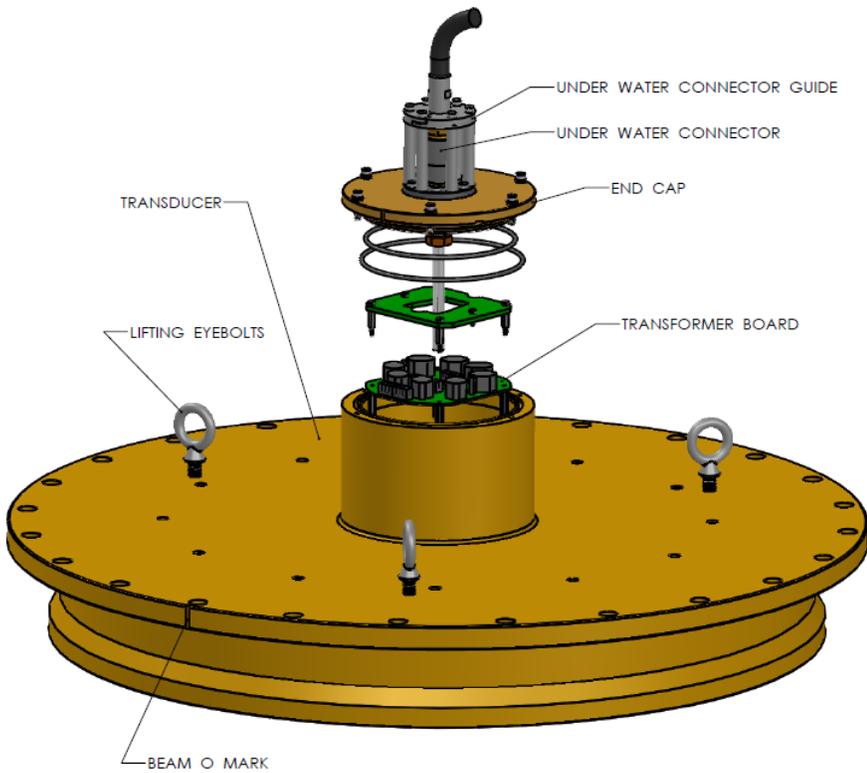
Side view of the Dual Frequency VM transducer in bronze housing with eyebolts used for lifting the transducer and exploded view of the transformer board in the transducer housing. The underwater connector guide (Carriage), underwater connector in the end cap is also shown.
